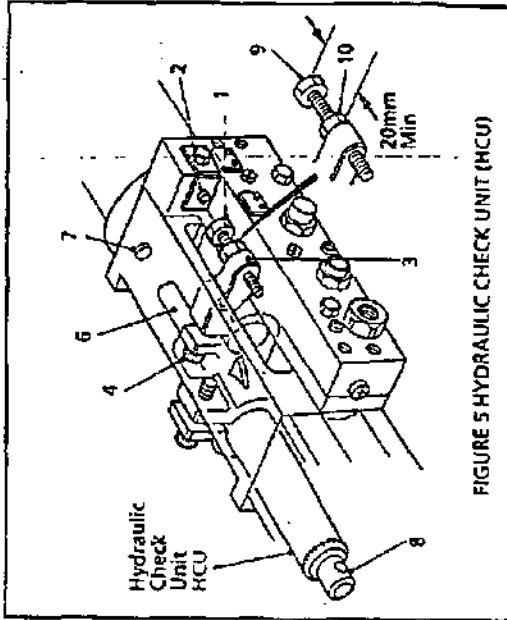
HYDRAULIC CHECK UNIT (HCU)
